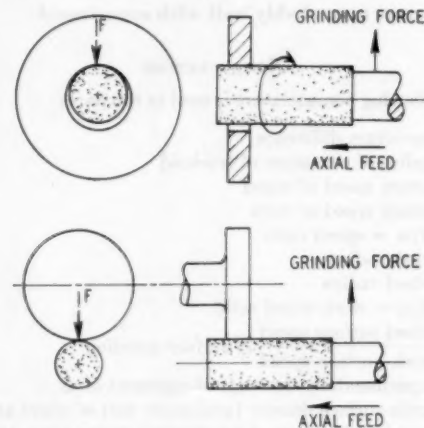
ARRANGEMENT FOR INTERNAL AND EXTERNAL GRINDING WITH MINIMUM OF WHEEL DULLING
